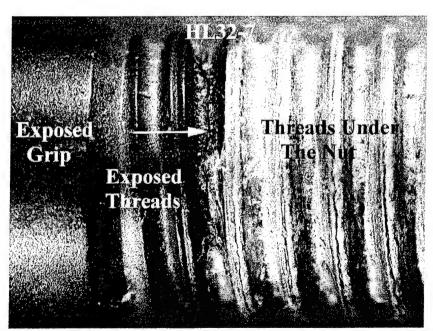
Increased Magnification of Cracking in the Threads of Fastener HL32-7. Arrow identifies the cracking located in the exposed/loaded threads.
